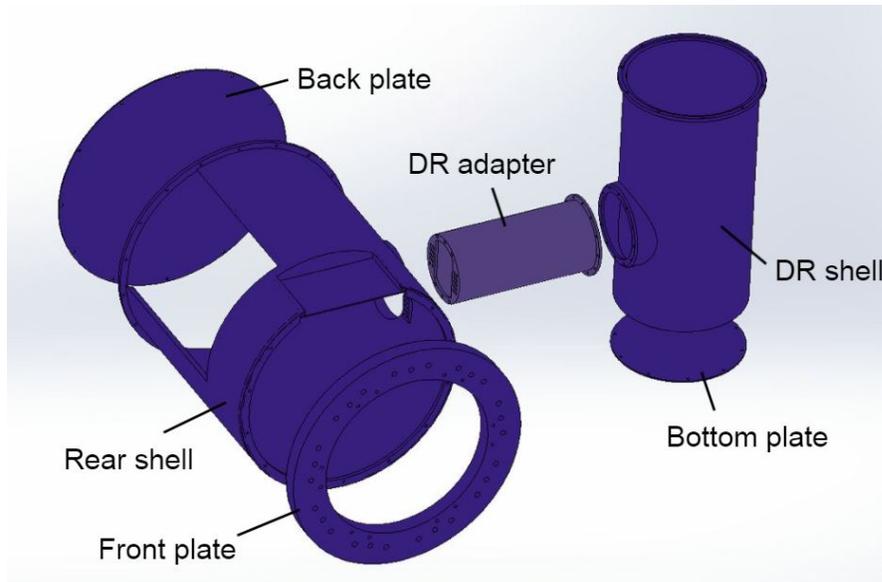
An exploded view of the 6061-T6 Al 4 K Mod-Cam shells and plates. The front plate is mounted onto the 40 K G10 ring through a pattern of G10 tabs (Figure 2.9). The instrument module (Figure 2.12) is mounted through the rear of the 4 K shell onto the front plate. The 4 K stage of a pulse tube is accommodated by a recess in the 4 K shell and thermally couples to the 4 K plate. The rear shell includes interfaces for readout plates (rectangular cutout) and the 4 K DR adapter and potential thermal connection. The 4 K DR adapter is mounted onto the DR shell, which is mounted on the 4 K shell of the Bluefors DR. When the DR shells are connected to the main shells, the 4 K DR adapter floats in the side cutout of the rear shell, and its position is offset due to predicted thermal contractions in order to be centered when cold (Section 2.3.3).
